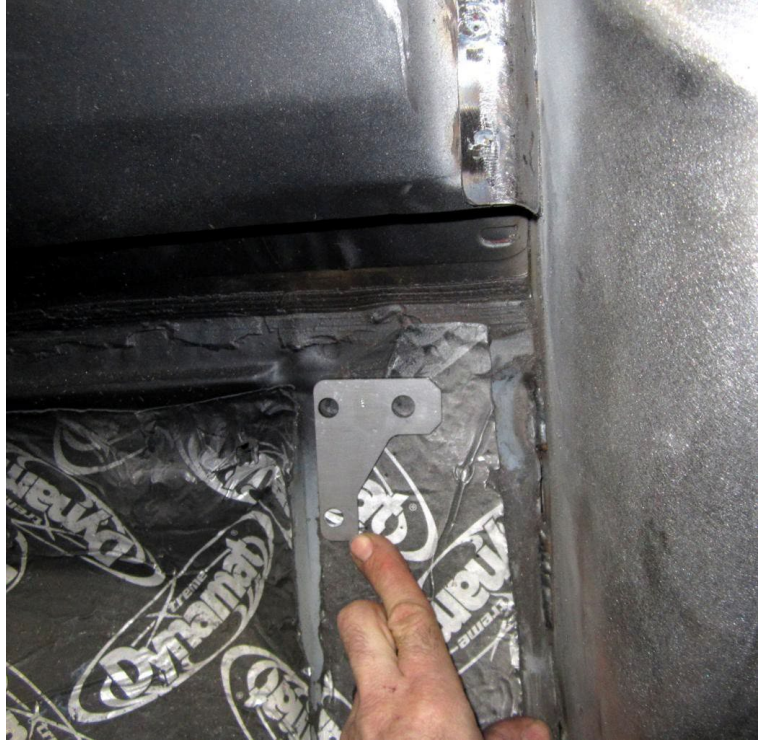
L shaped flat bracket that will sandwich between the floor and nuts
